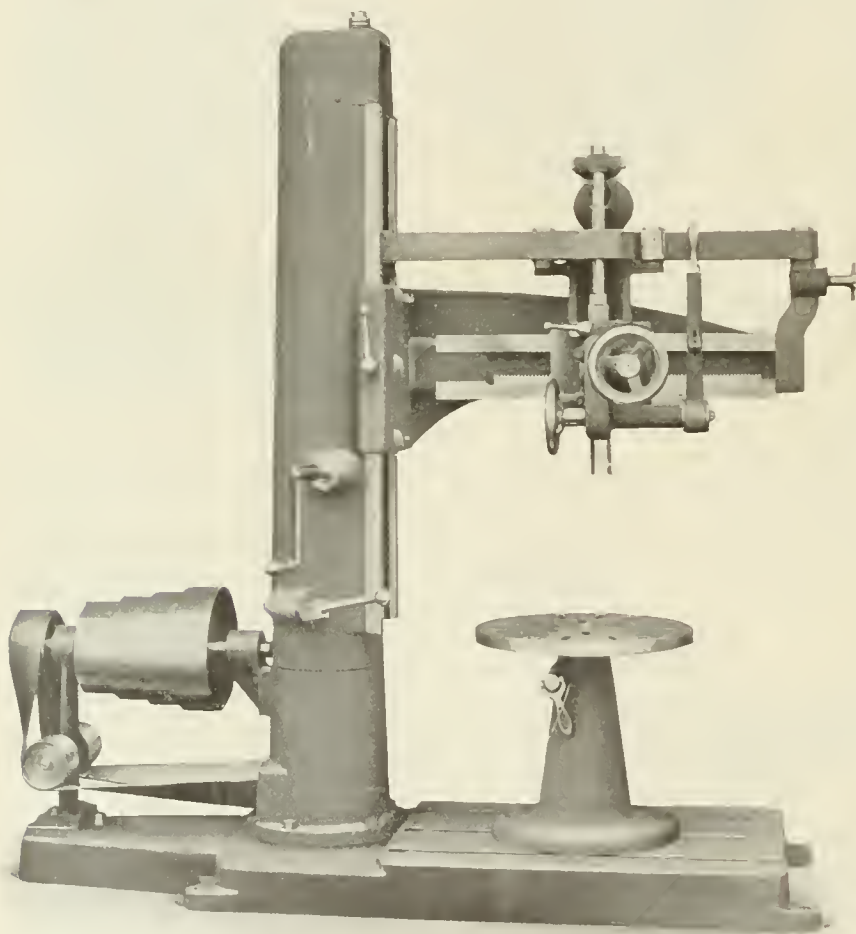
Gang All-belt-driven Radial Drilling Machine
